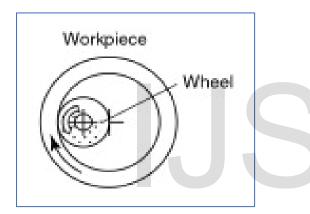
Grinding process for internal cylindrical surface using a grinding wheel [15].
